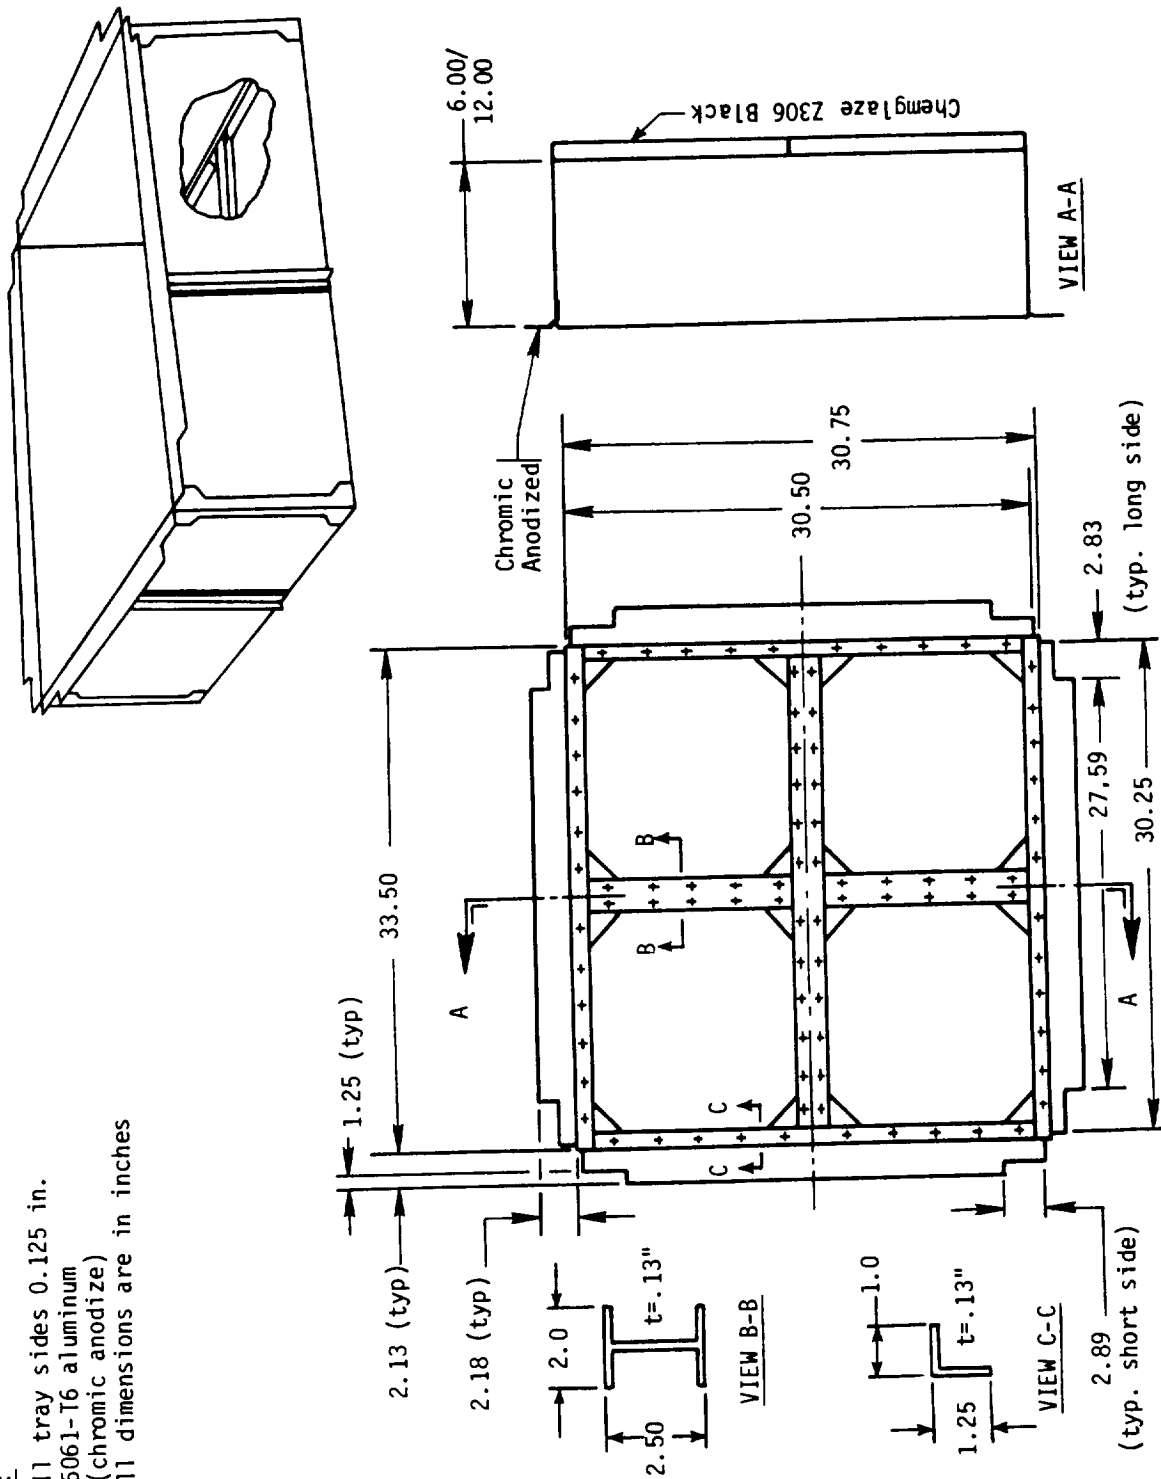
LDEF End "Center" Tray - 6 & 12 Inch Deep
